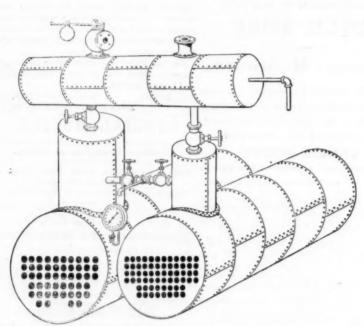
Defective Setting-no Gauge on the Exploded Boiler.
